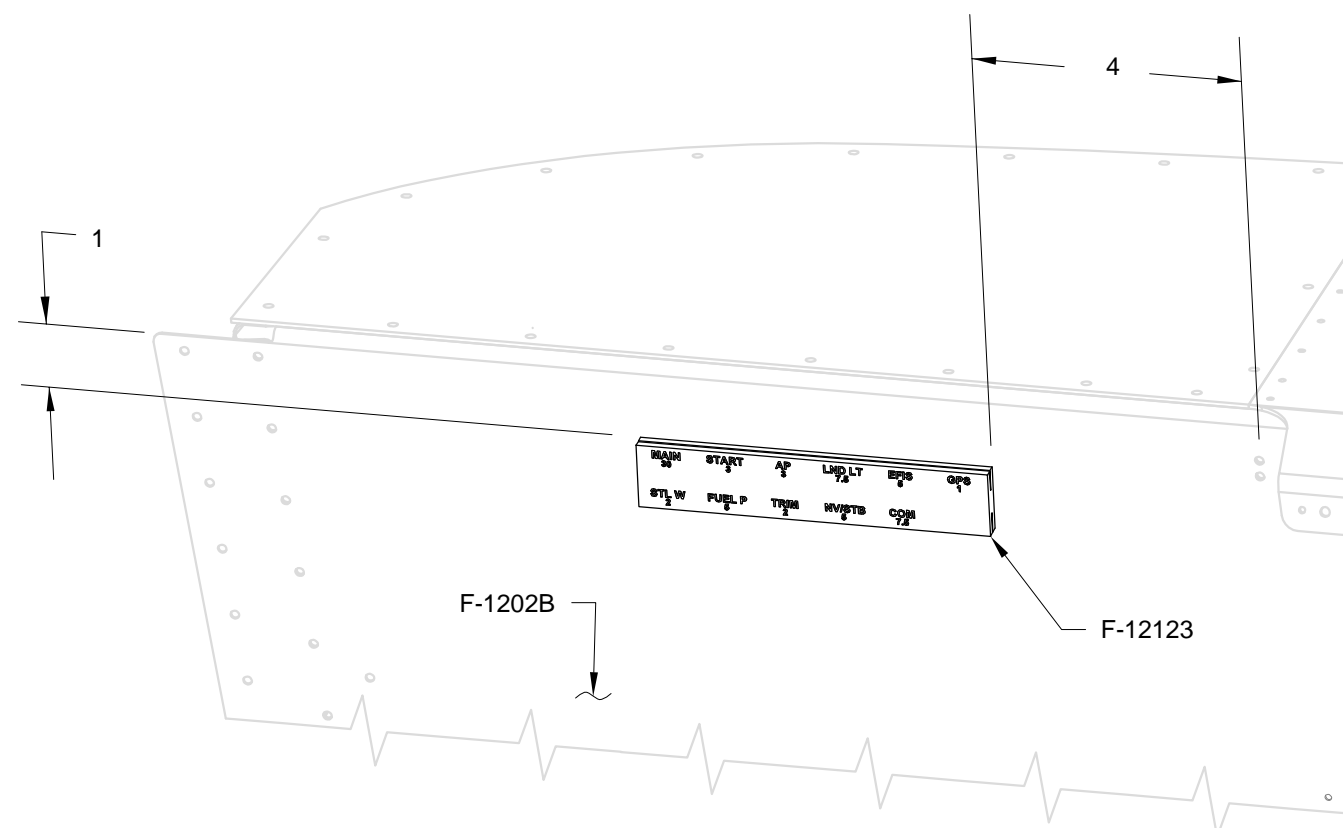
INSTALLING FUSE HOLDER ASSEMBLY TO UNDERSIDE OF PANEL BASE (SPARE FUSES NOT SHOWN)
